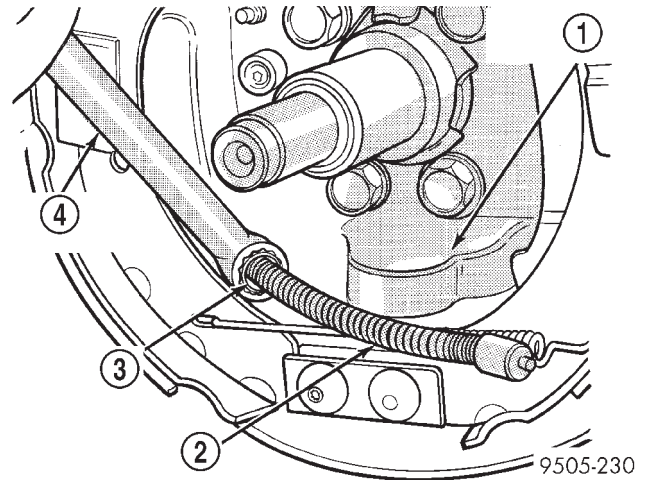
Park Brake Cable Removal From Brake Support Plate
